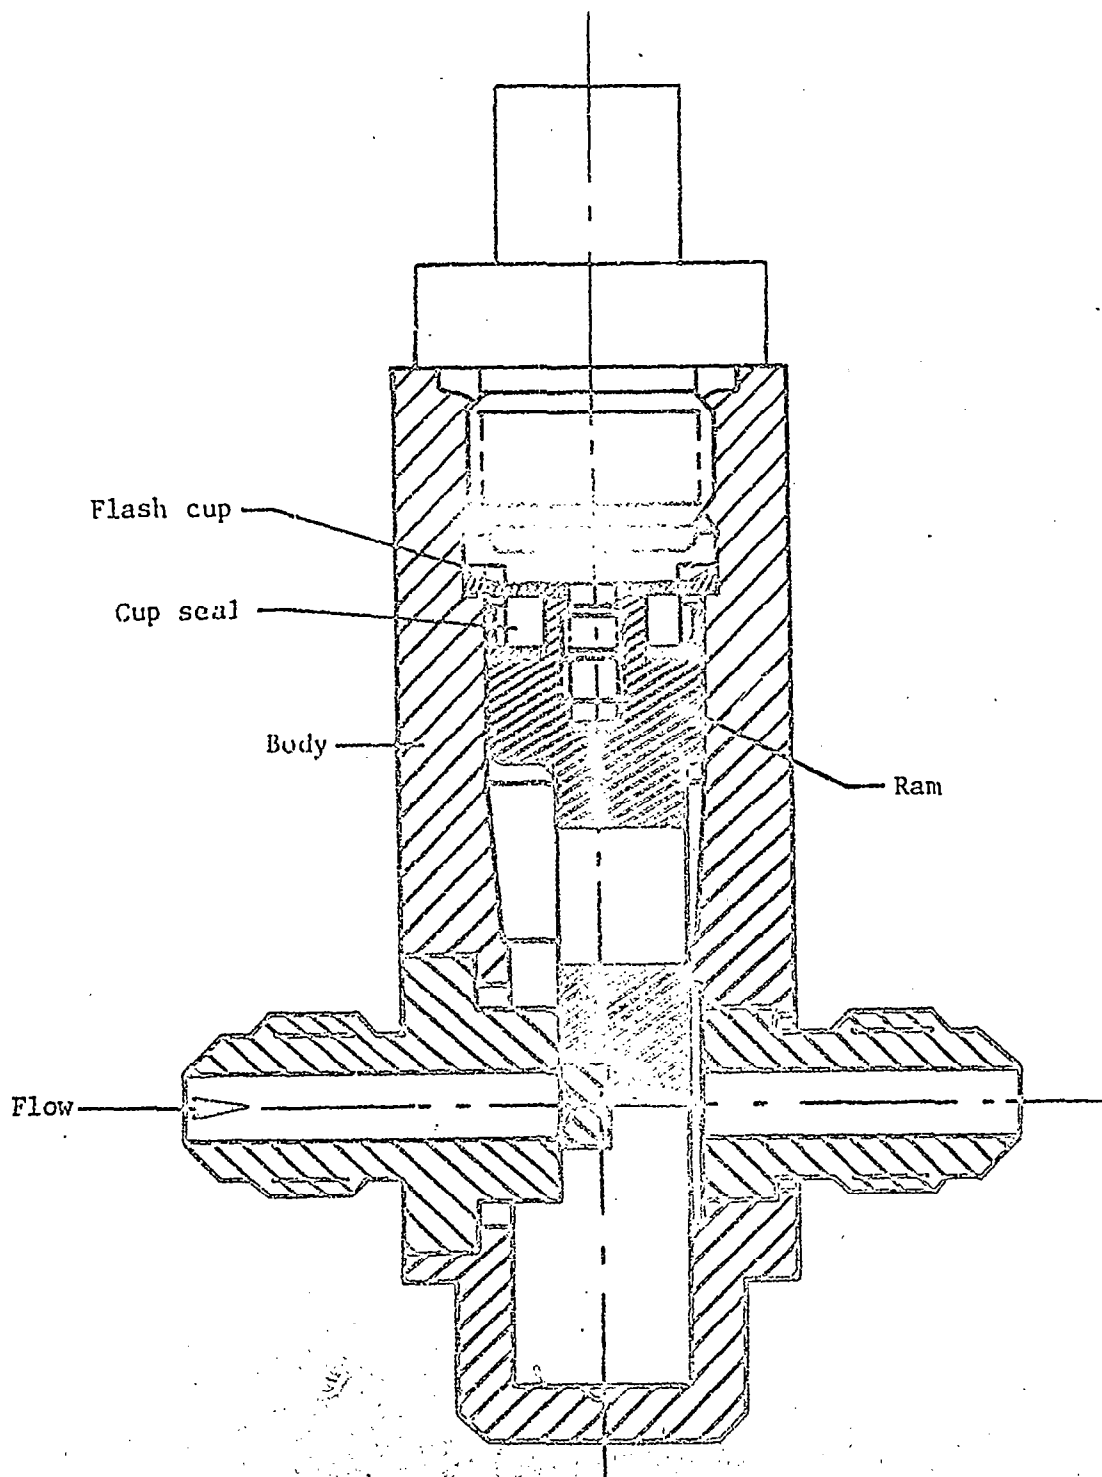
$\frac{1}{4}$  inch explosive valve.
